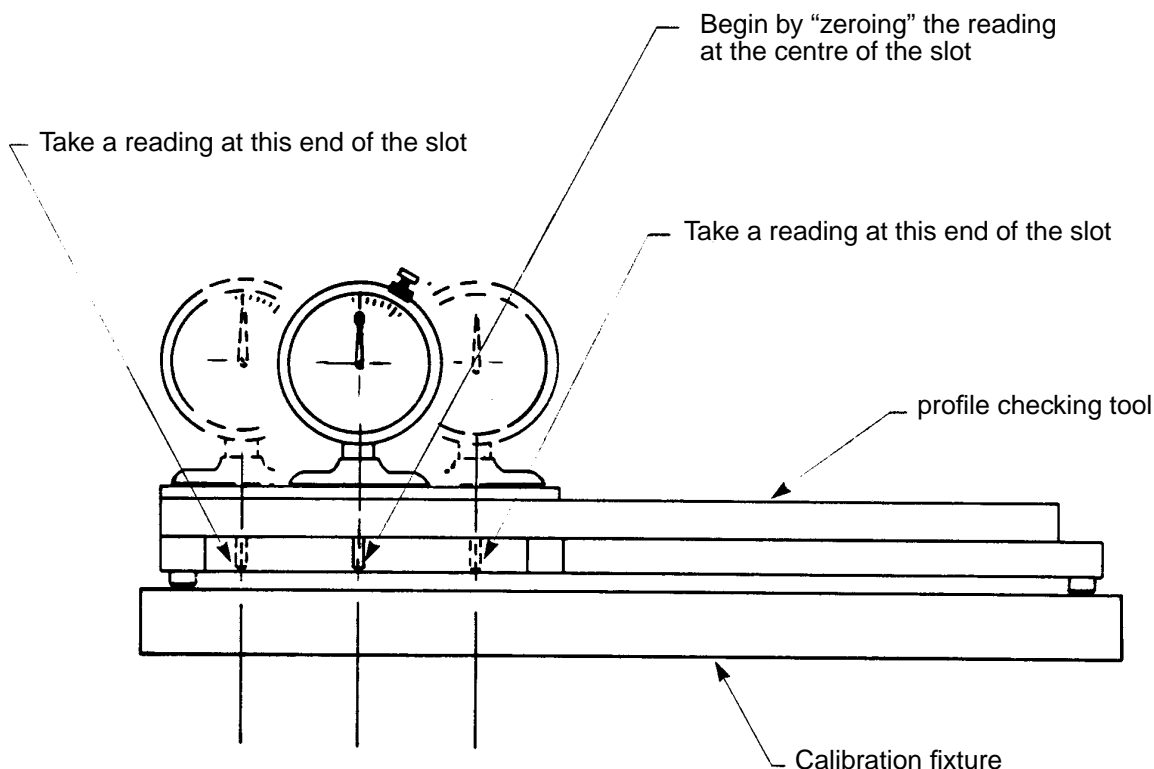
CALIBRATION OF PROFILE CHECKING TOOL
